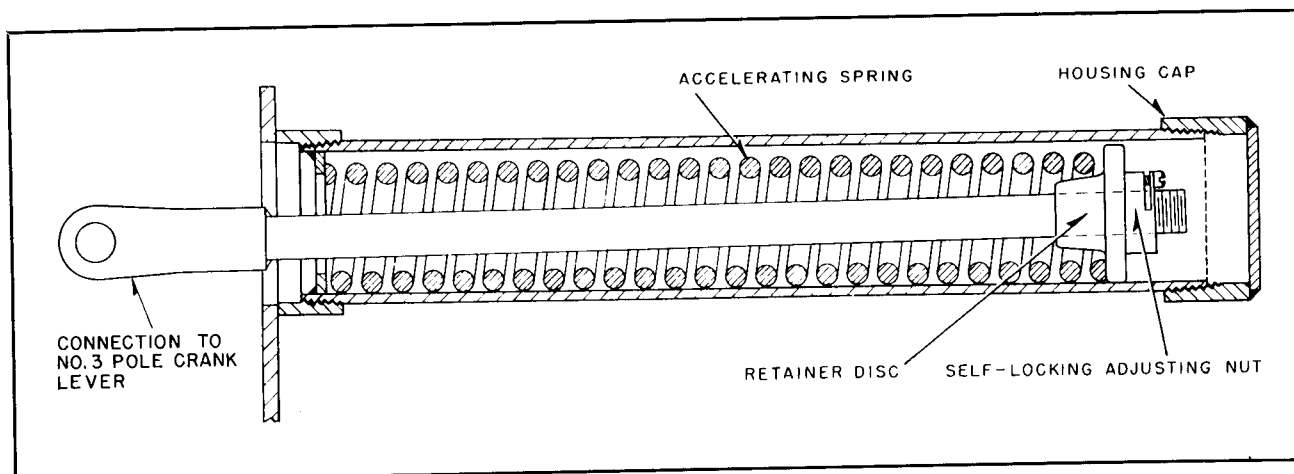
Accelerating Spring Used with Pneumatic Mechanism
